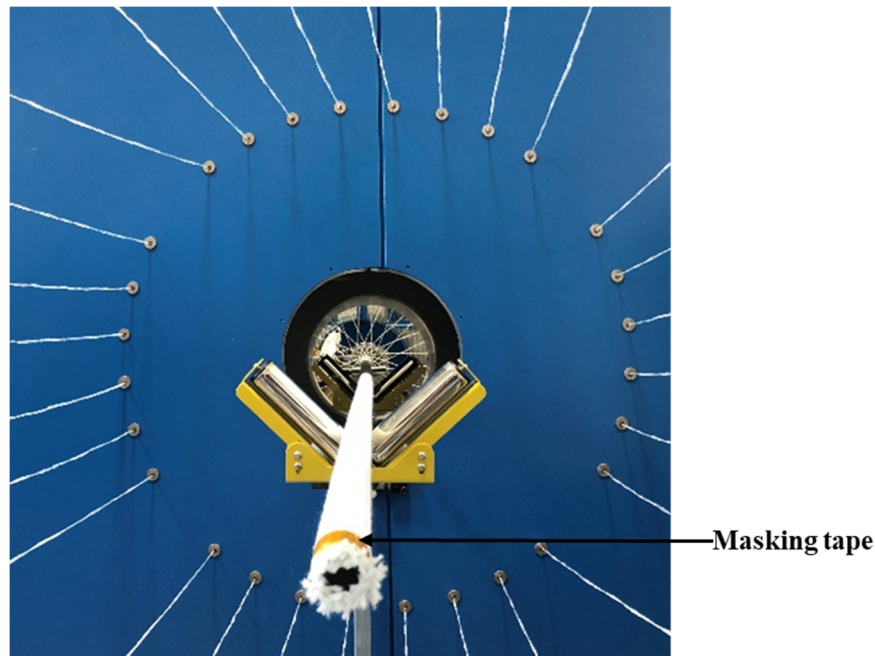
Overbraided mandrel with masking tape before extraction from the braiding machine.
